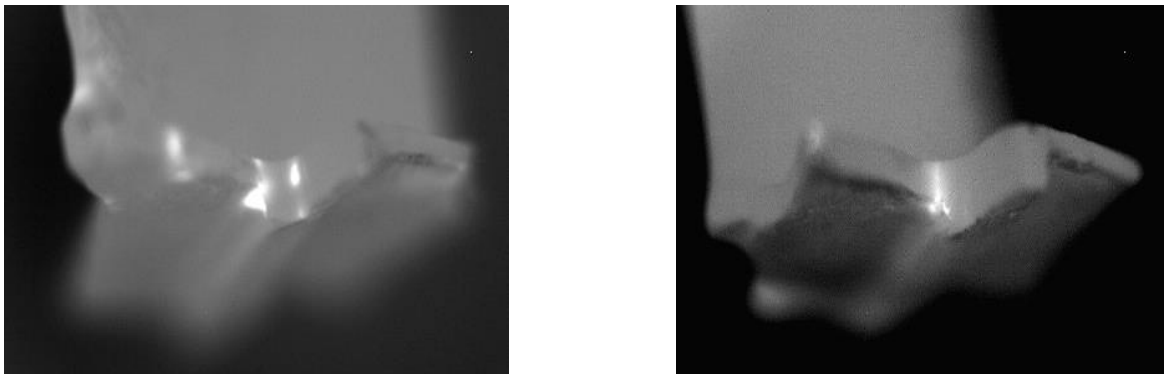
Flaw detection by Sonic IR Imaging technique
